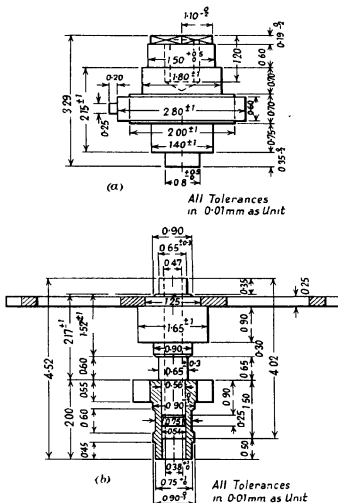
TOLERANCES OF WATCH PARTS (*Longines*)
